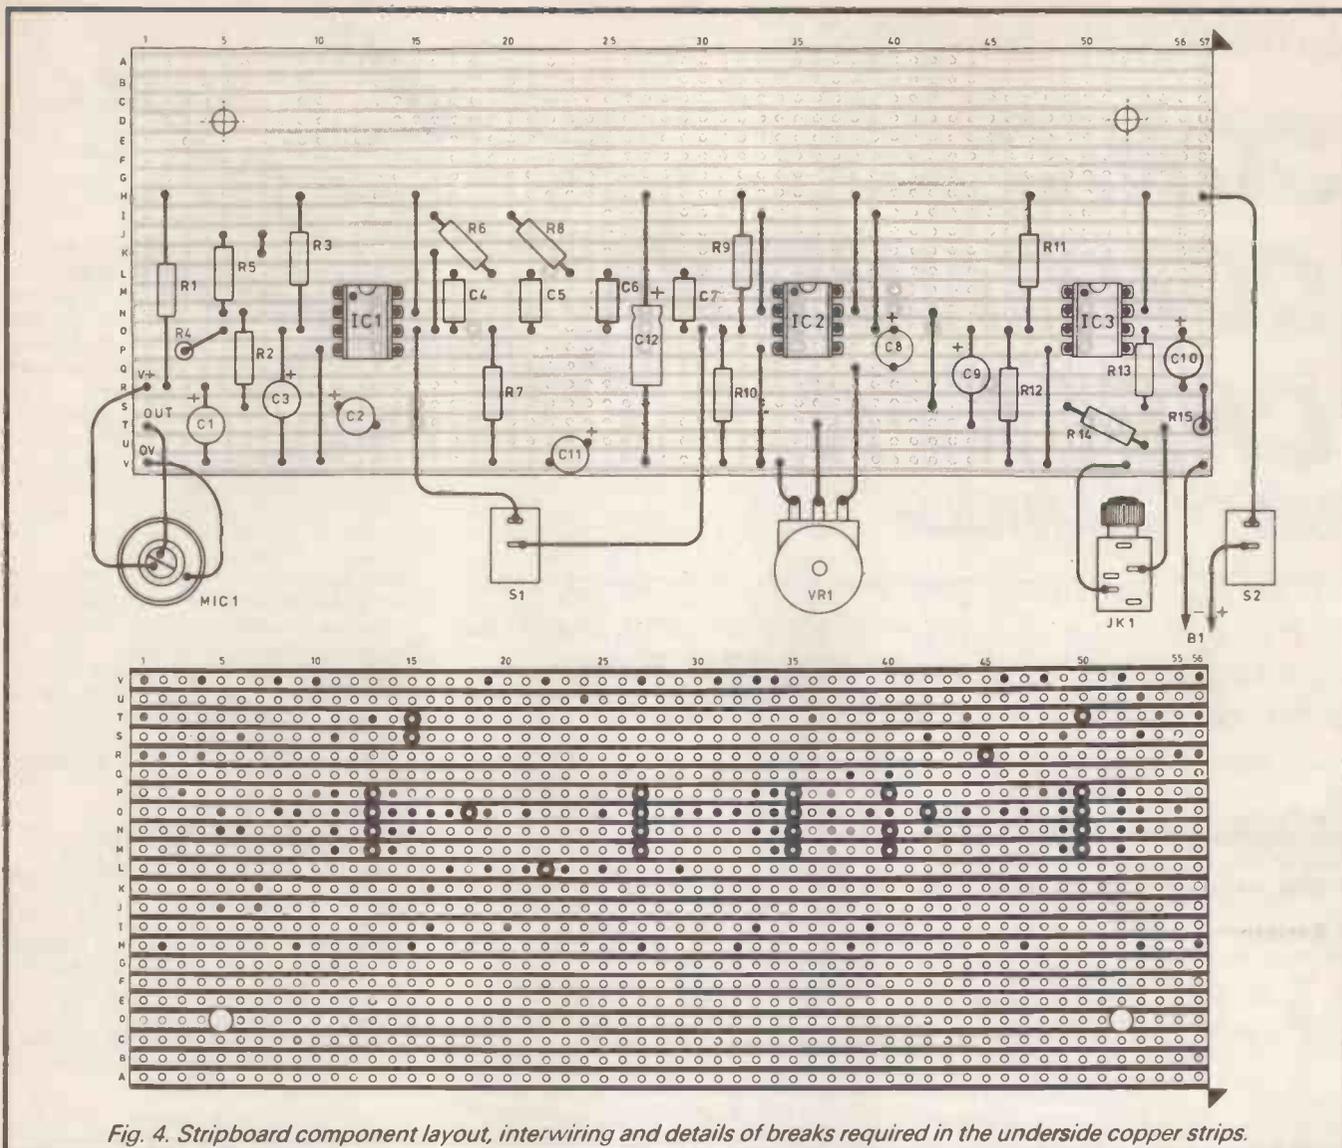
Stripboard component layout, interwiring and details of breaks required in the underside copper strips.
